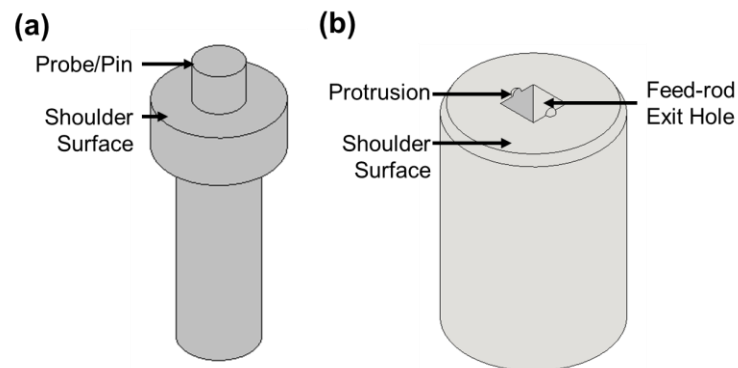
A schematic showing the key differences in tool geometry for (a) friction stir welding and (b) additive friction stir deposition
